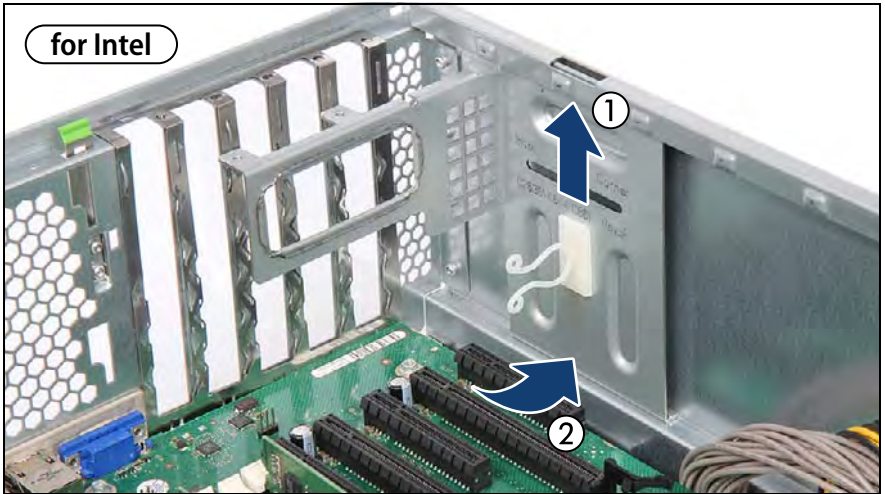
Installing the coprocessor card mounting bracket (Intel) (B)
